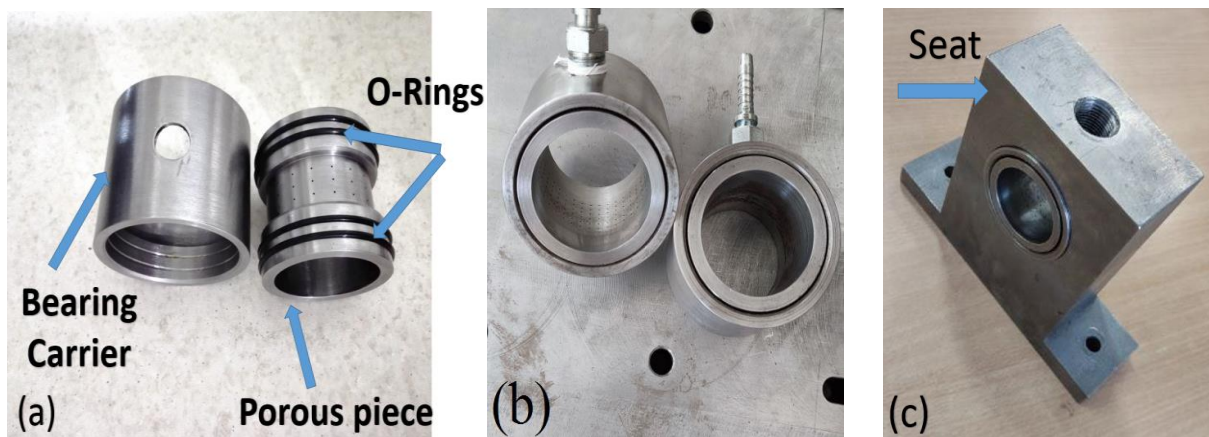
Schematic of the first air bearing design (a) before assembly, (b) after the assembly of the porous piece into the bearing carrier, and (c) after the assembly of the components into the seat
